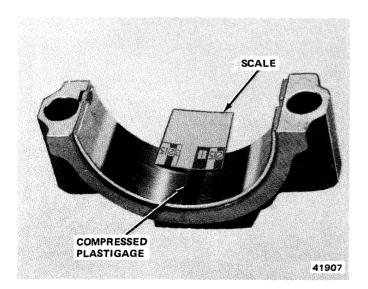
A-42 Bearing Clearance Measurement with Plastigage
